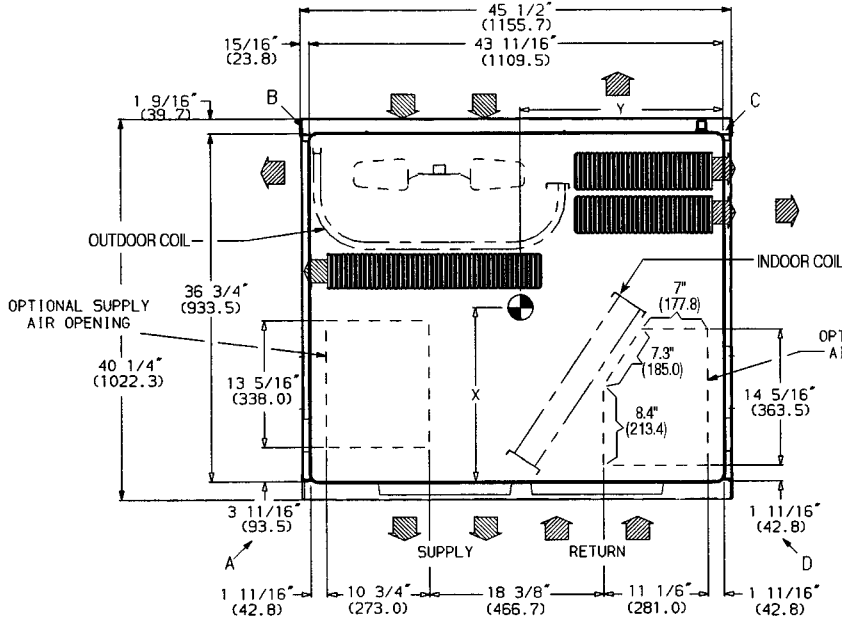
Dimensions; 657A024,030 With Optional Base Rail
